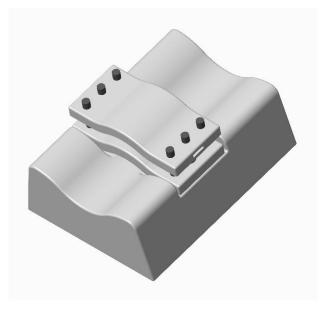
A CAD assembly of the one-bracket version of *Iteration IV* with push springs.
